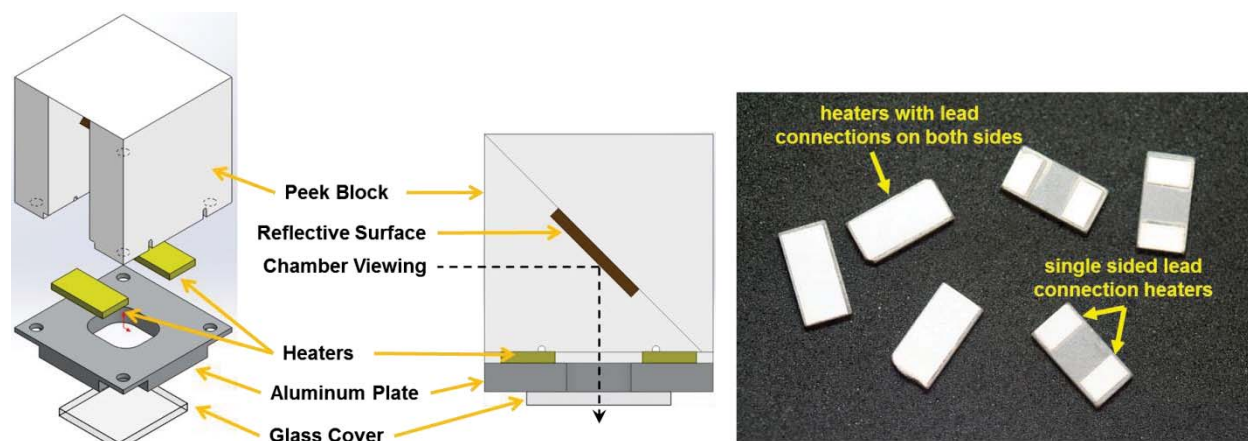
PTC heaters (PR425C090S101H) and heater assembly
